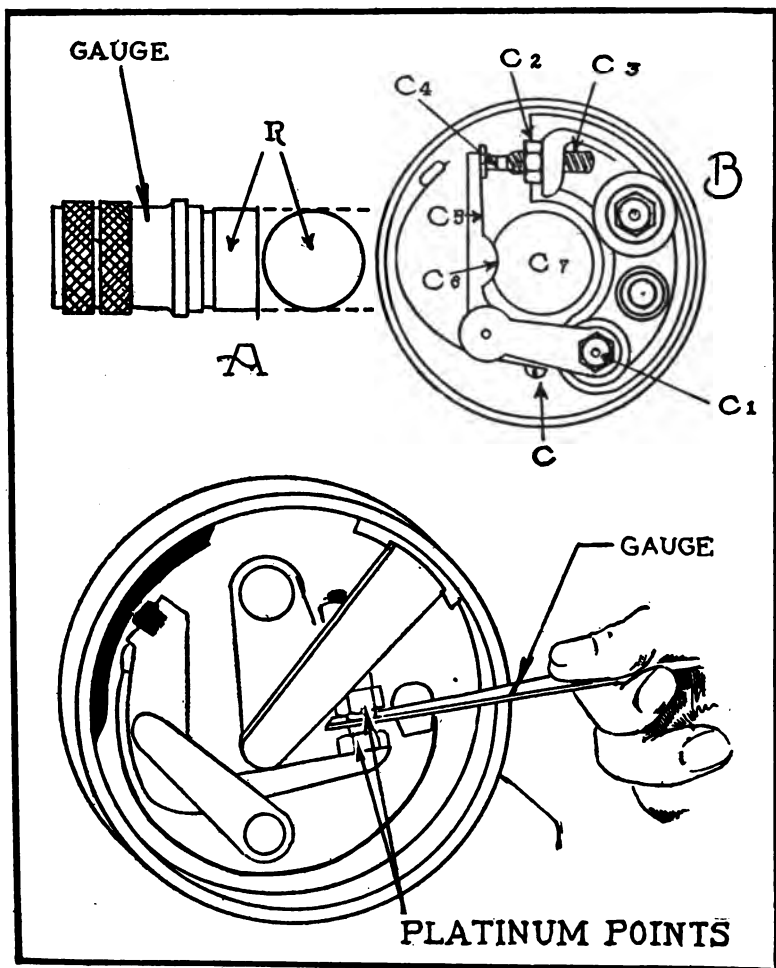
Outlining the Use of Gauges for Setting Magneto Contact Breaker Points.
